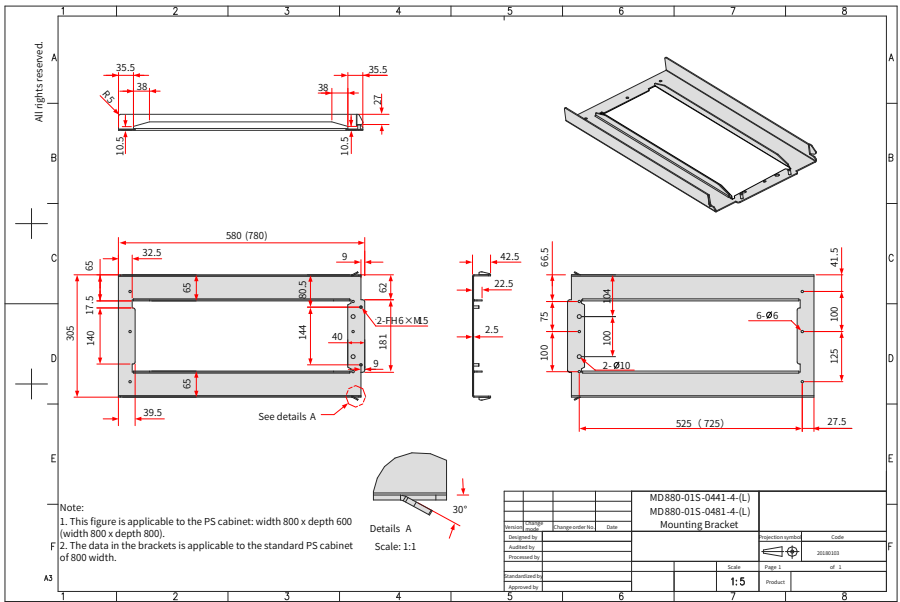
Mounting bracket dimensions of MD880-01S-0441-4-(L)/ MD880-01S-0481-4-(L) (standard)
